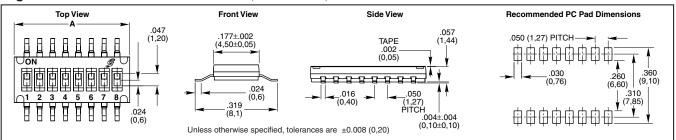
Series 97R DIMENSIONS in inches (and millimeters)
